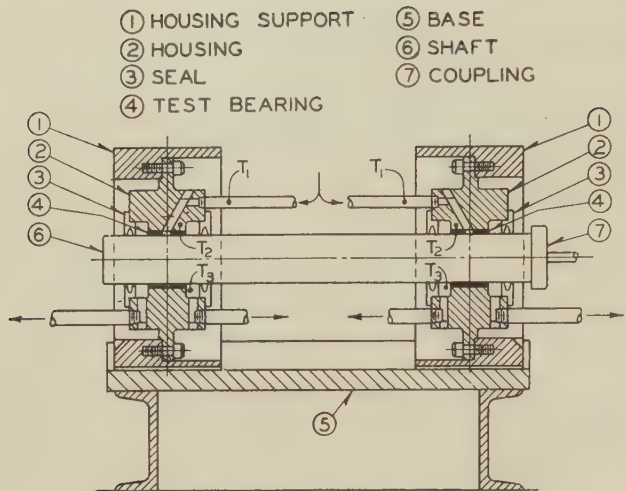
TEST MACHINE FOR JOURNAL BEARINGS
